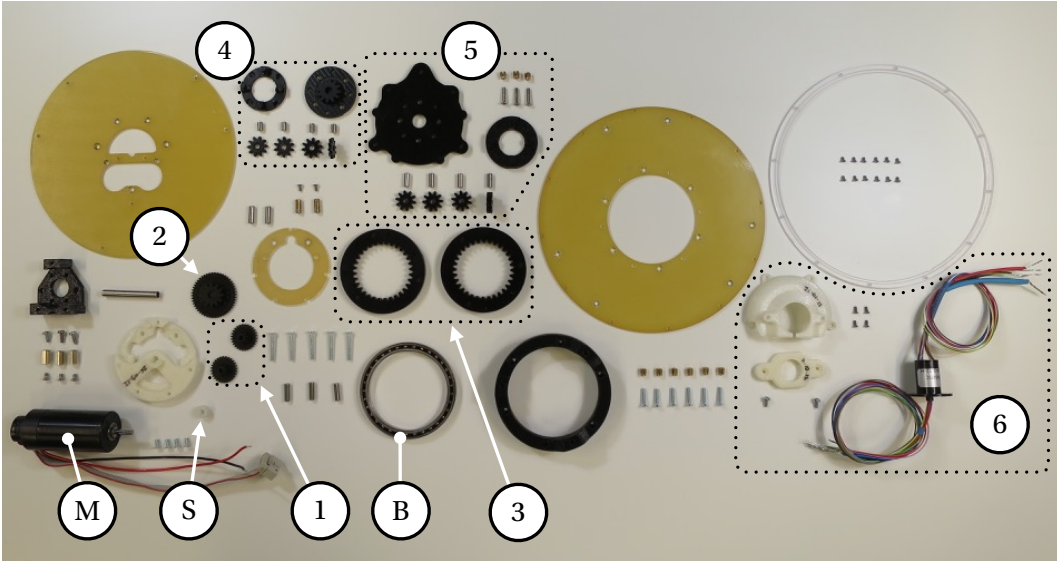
102 elements (13 for the POM ring). 89 elements necessary to assemble Gearbox C. 13 additional elements are needed to assemble the POM ring. The labels correspond to the labels of the exploded view in Figure 4.1. All the gears are machine-milled in POM.
